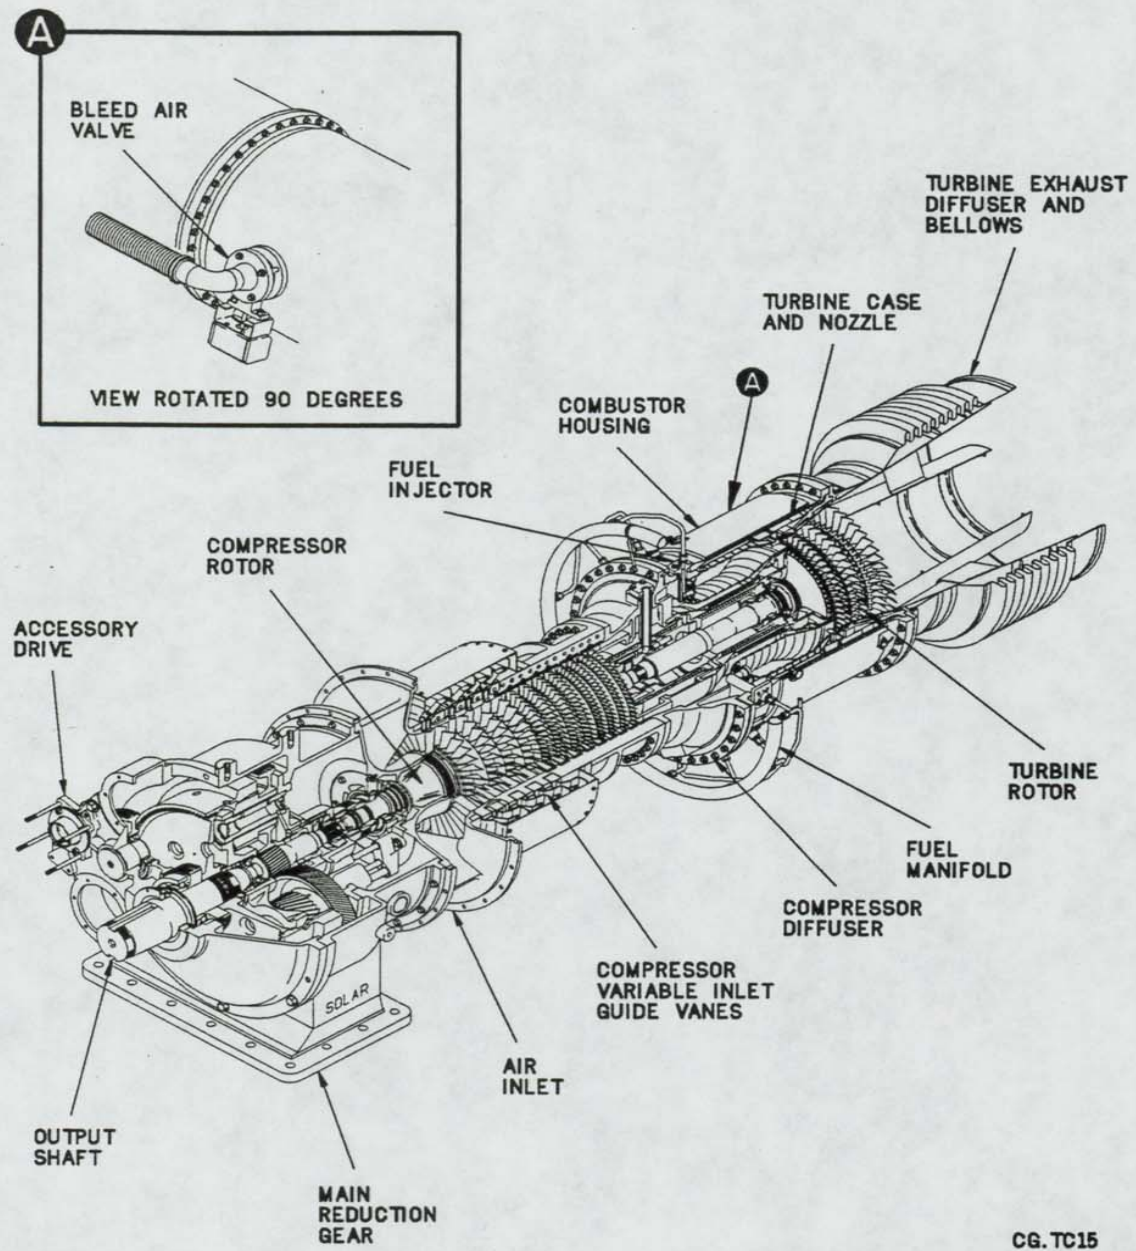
Single Shaft Taurus Turbine Cutaway
